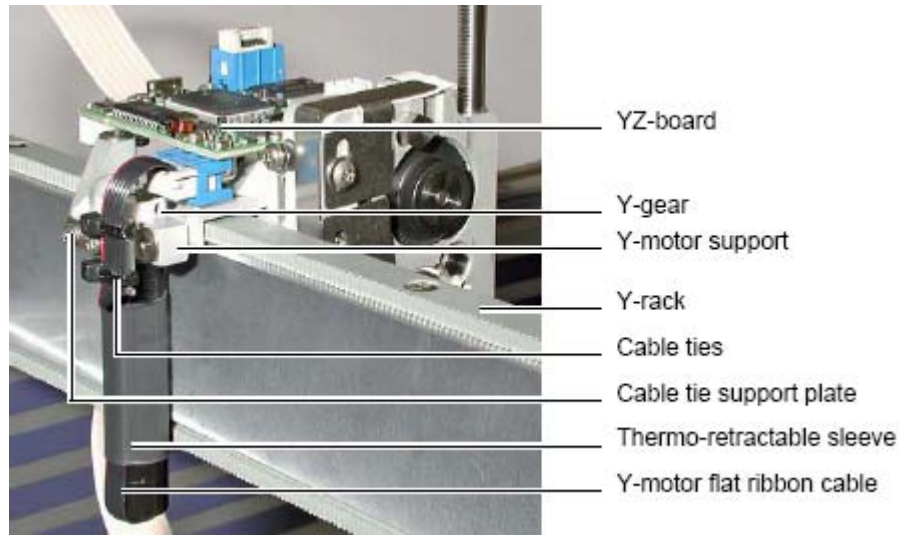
Y-motor Assembly with Spring-loaded Y-motor Support
